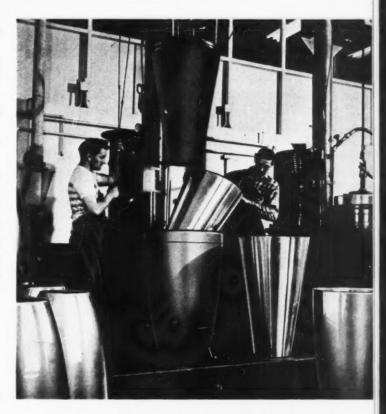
A rolled and Heliarc seam-welded conical blank is fitted inside a Meehanite die-holder, and when the expanding rubber die descends, the straight-sided cone is formed into an aft section for a 230-gallon jettisonable fuel tank
